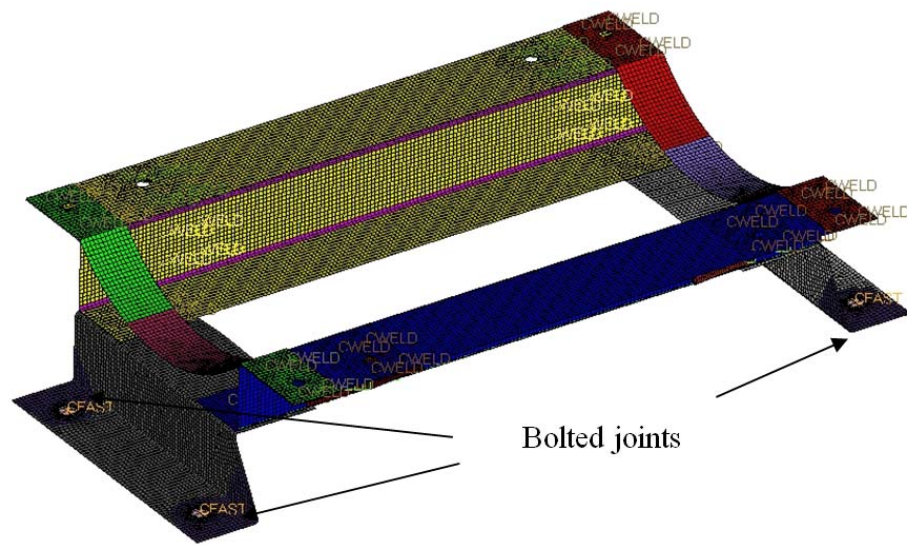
CAE Model of the full welded structure with bolted joints
